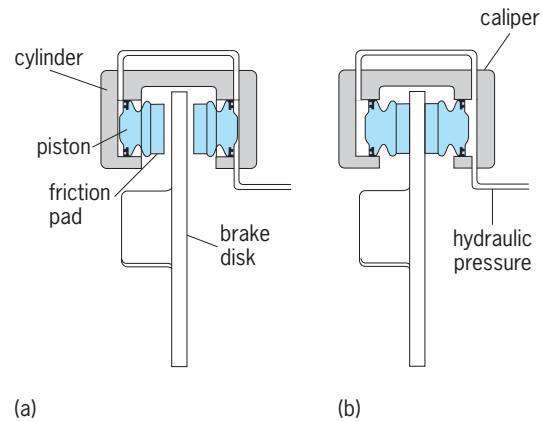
Caliper disk brake. (a) Friction pads on either side of a disk that is free to rotate. (b) Brake applied, hydraulic pressure forces the pistons toward the disk to stop its rotation and hold it stationary. (Automotive & Technical Writing, Charlottesville, Virginia)
